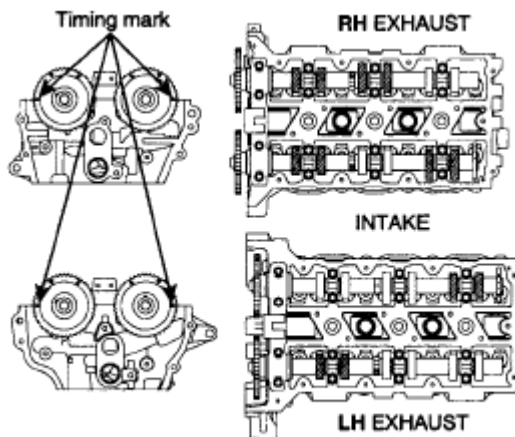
Checking Mark (A) Of Camshaft Timing Sprockets Are In Straight Line On Cylinder Head Surface (2 Of 2)
